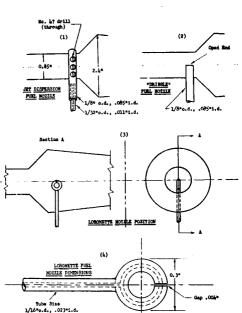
FUEL NOZZLES AND LOCATIONS FOR OPERATION OF 6-1 COMBUSTOR WITH GASOLDGE
